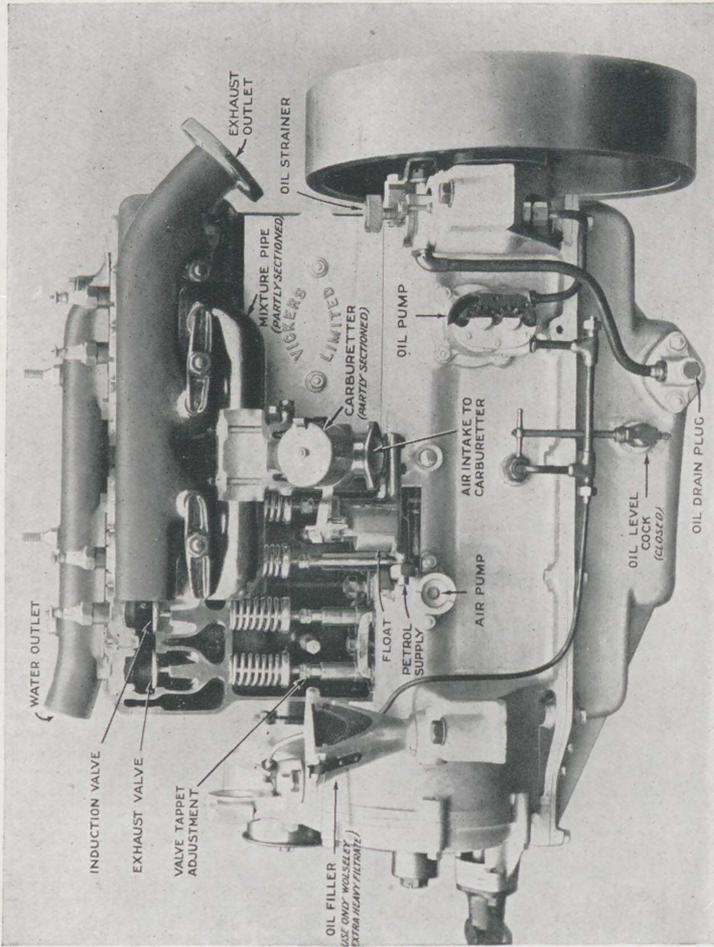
Section of a 4-Cylinder Motor, showing Carburettor and Oil Pump
